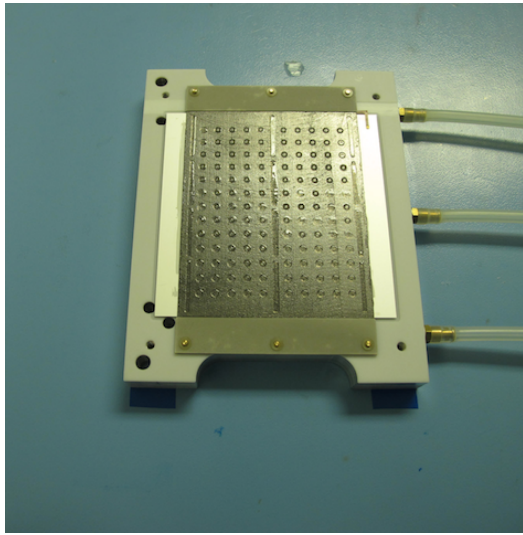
shows a sensor already glued to one side of the TPG baseboard. The assembly of the other side follows exactly the same procedure. A 100  $\mu\text{m}$ -thick mask with a glue distribution pattern is placed over the baseboard between the facings and fixed with kapton tapes before spreading the glue. The mask pattern is shown in Fig. 38. The pattern provides a good glue coverage for most of the sensor area while avoiding the edges and ensures the required fixation of the sensor (and in particular under the bond-pads) that avoids difficulties during wire-bonding operations. The glue mask has been used for all modules assembled in KEK and for the last module built by the University of Geneva, GMX-2008. The remaining six modules assembled in Geneva were fabricated without the mask and therefore without an accurate control of the total glue dispensed.
